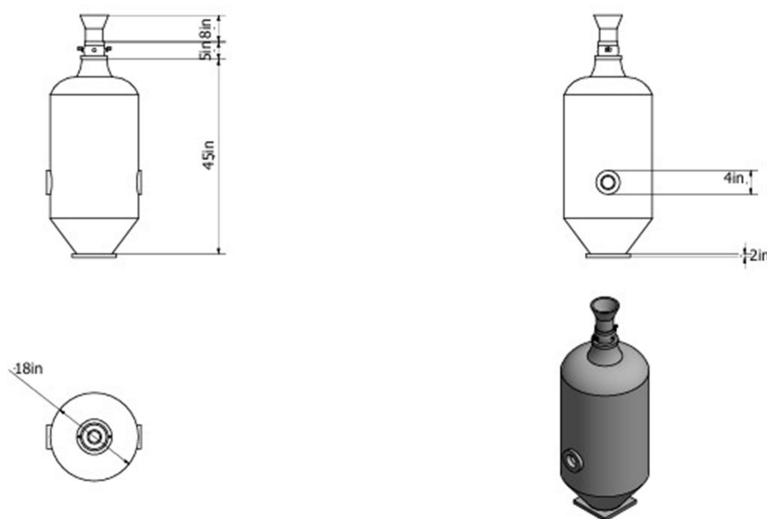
Orthographic and 3D drawing of a Pulper Machine
